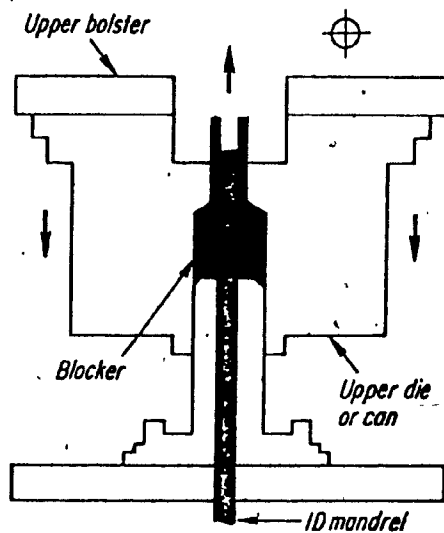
Cross section of the extrusion die assembly; pipe being formed is in color.
